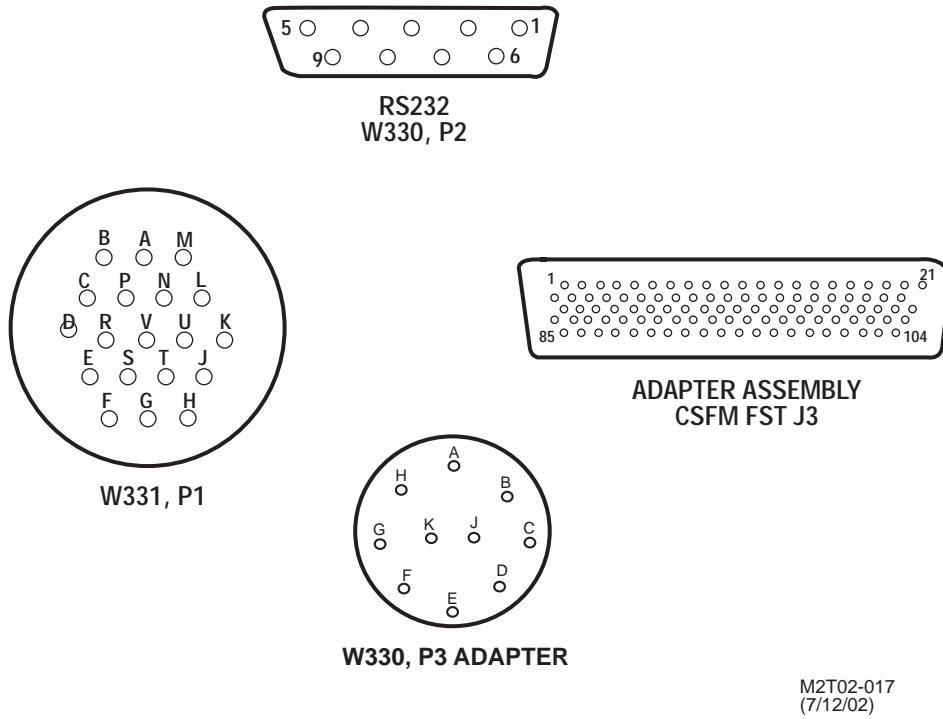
Test Cable and Test Adapter Connector Pin Arrangement
